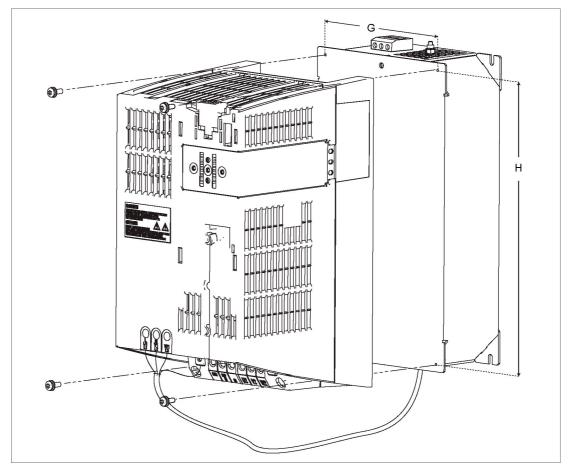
Mounting the PM340 with a line reactor, using frame size FSB as an example
